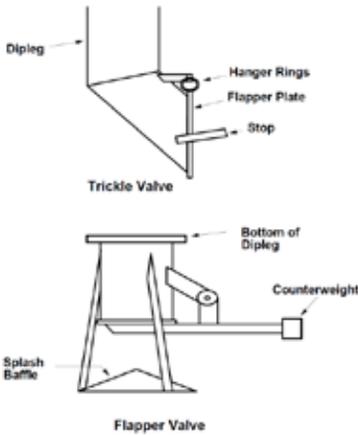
Schematic Drawing of Trickle and Counterweighted Flapper Valves
